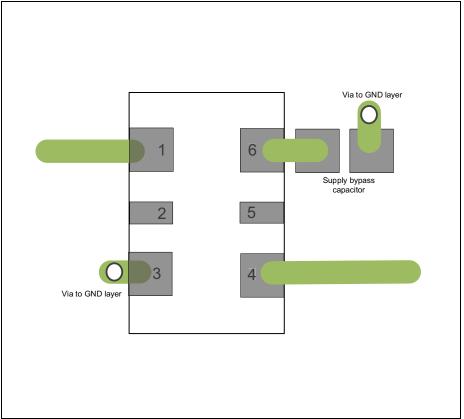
DSA1101/21/05/25 Recommended Board Layout.
